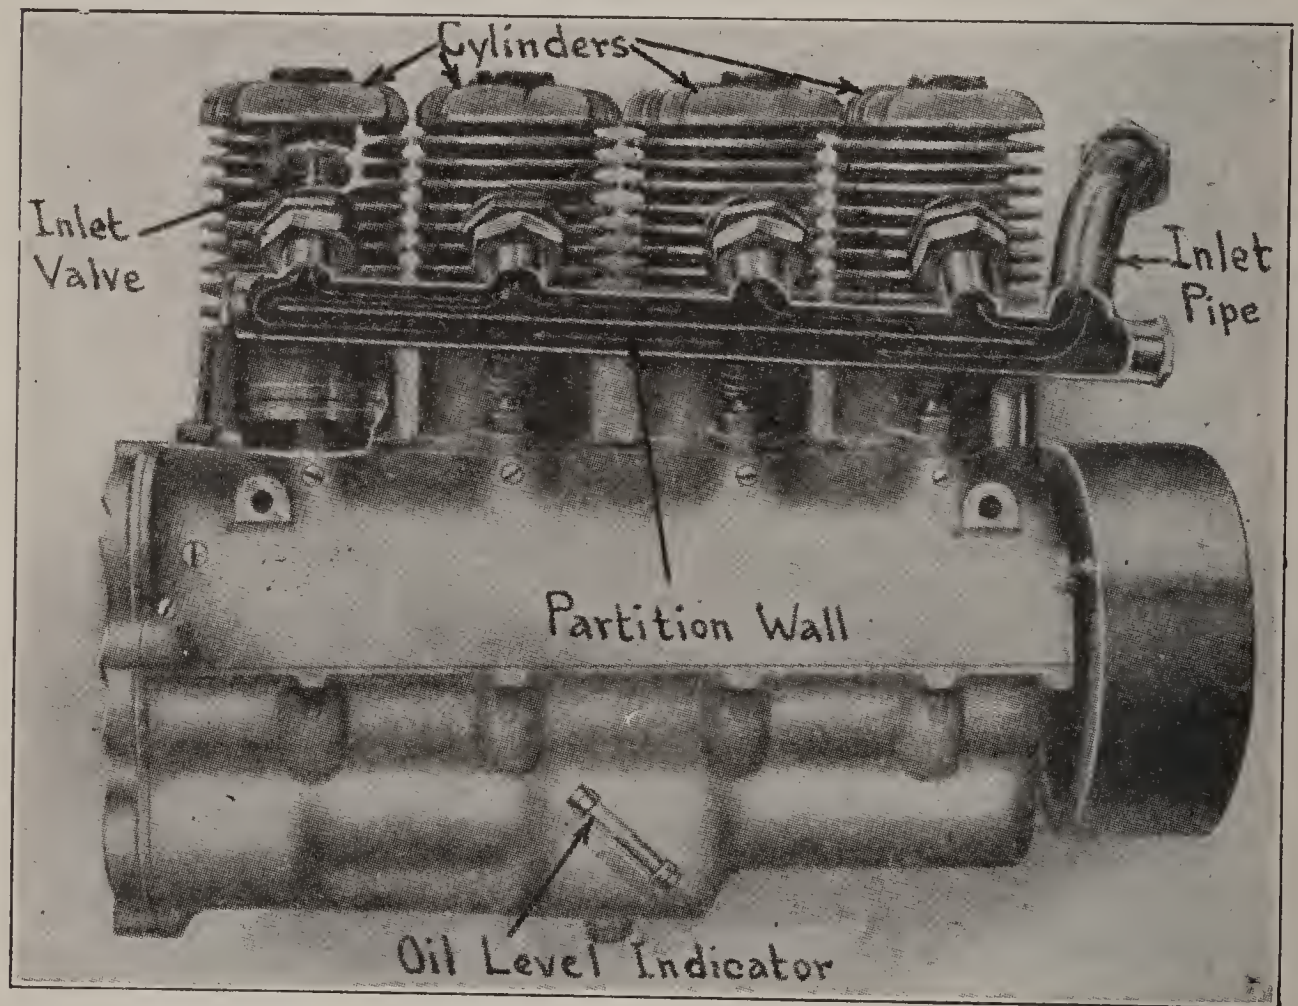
Inlet Manifold for Four Cylinder Motorcycle Power Plant.
